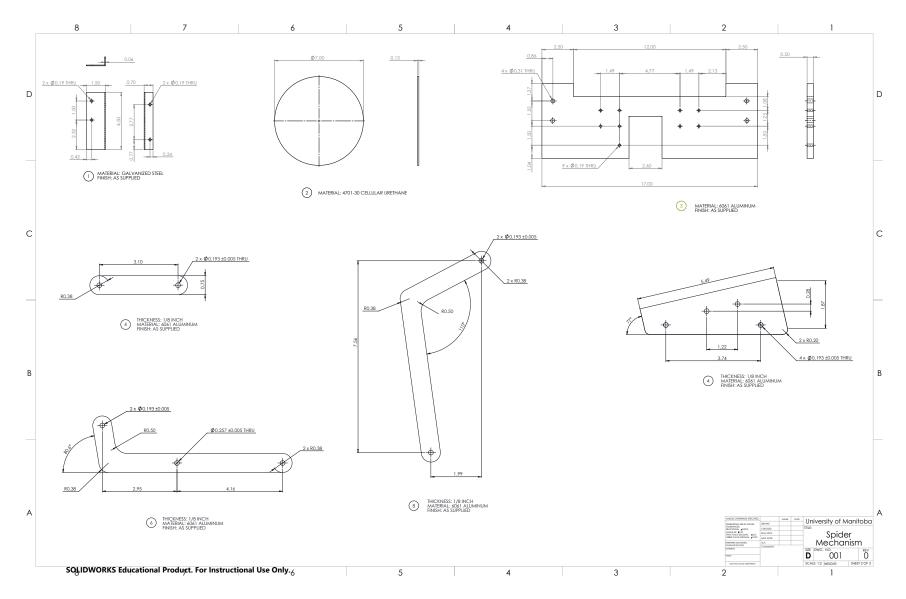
Spider mechanism detailed drawing sheet 2 [1].
